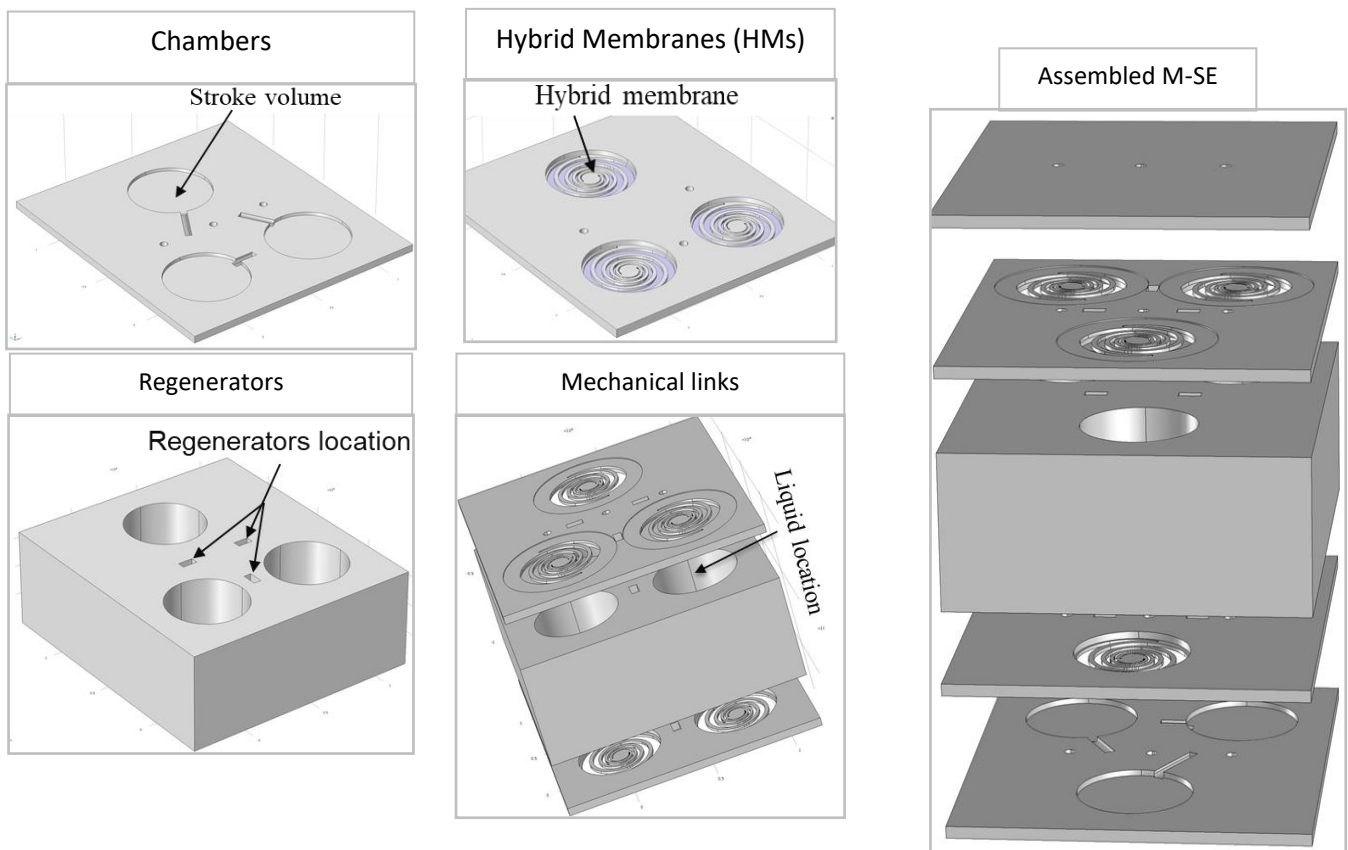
3D CAD view of chambers and membranes alone and assembled to complete the micromachine
